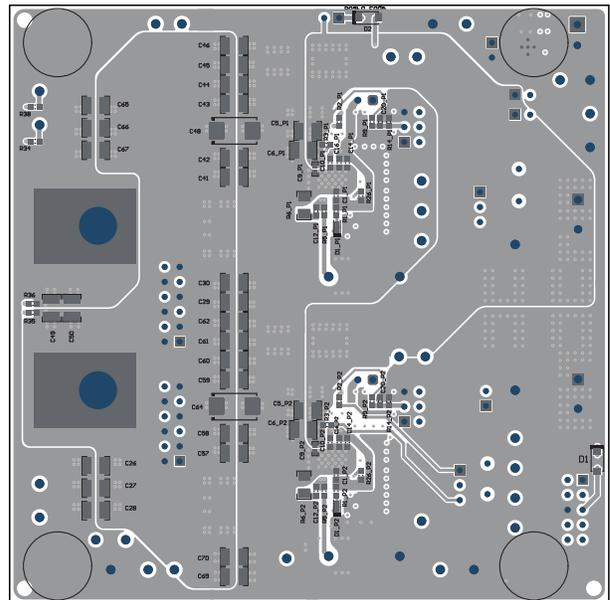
TPS546B24AEVM-2PH Bottom Side Component View (Bottom View)
